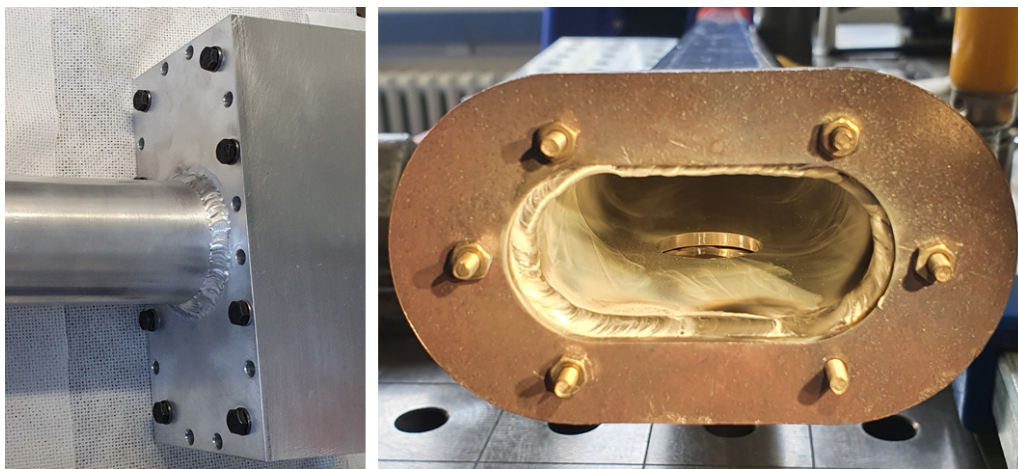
TIG welding seam between the vacuum pipe and box of the vacuum recipient (left) and copper heat bridge for the welding of flanges to the oval tubes of the vacuum recipient (right).
